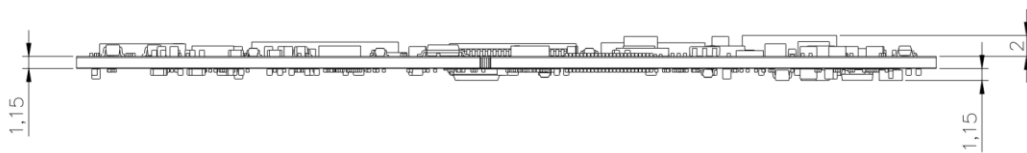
SMARC iMX6-UL/ULL Lateral view widths dimensions
